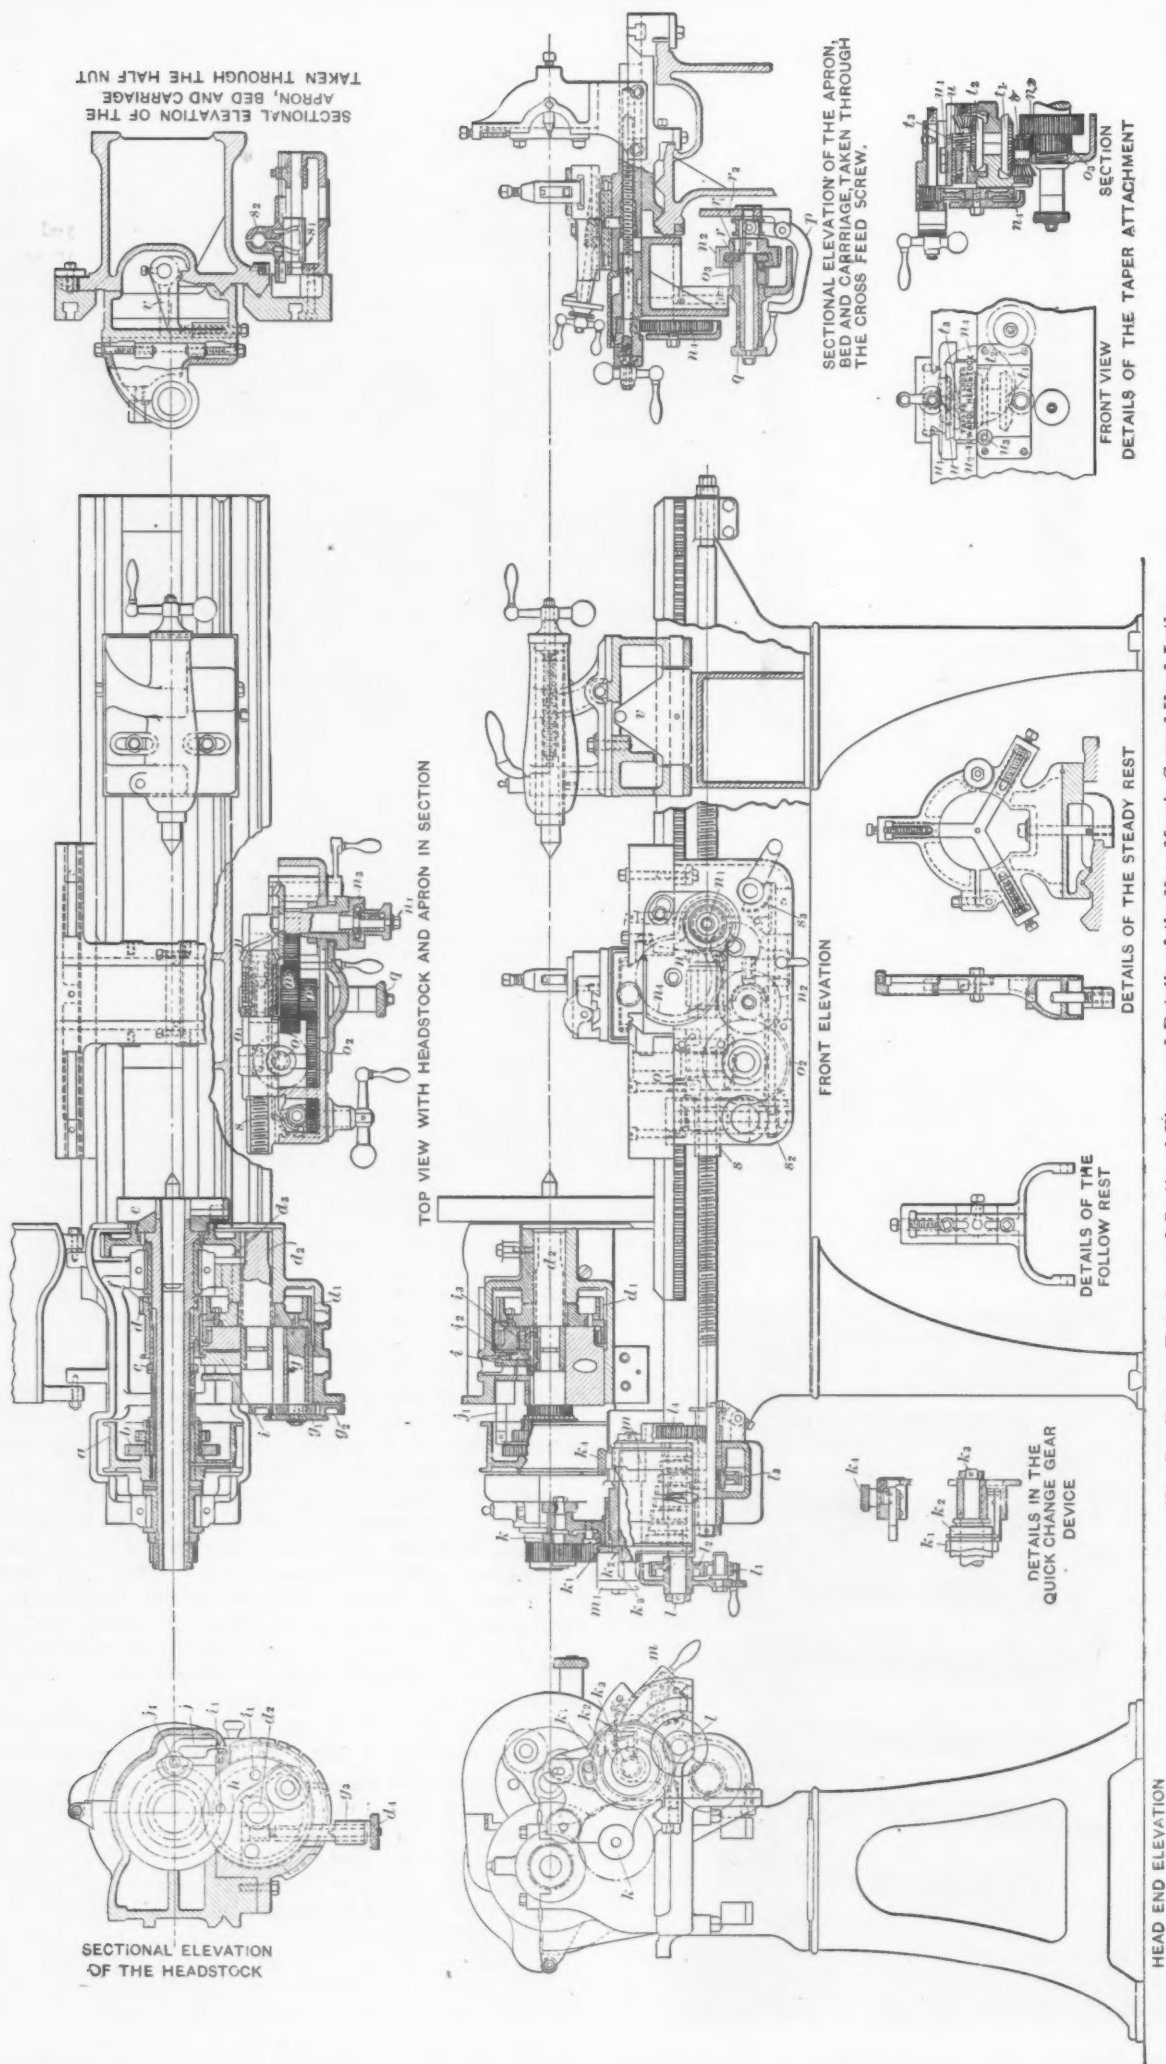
Various Exterior and Sectional Views and Details of the New Morris Geared-Head Lathe.
